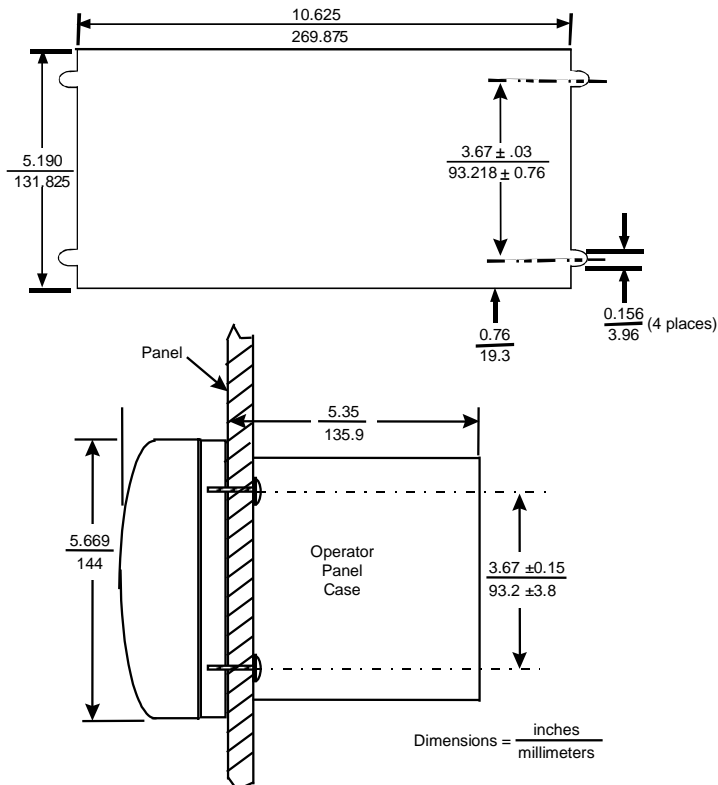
Operator Interface Panel Mounting Dimensions, Type 12, Model 551
